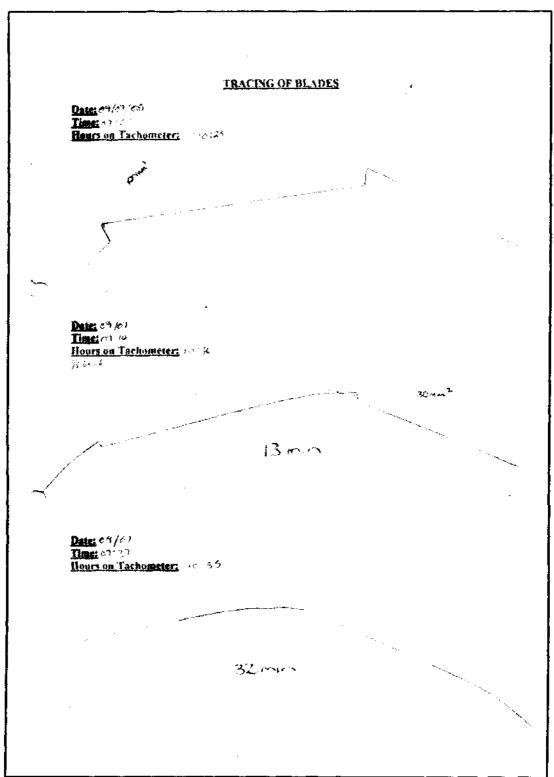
Wear of a 2.8mm 10 edged slicing blade in sandy soils at 45Rc.
